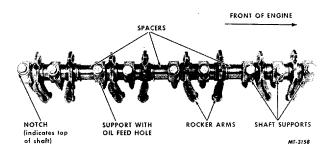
Installation of Rocker Arm Assemblies on Right Bank (Even Numbers) and Left Bank (Odd Numbers)
